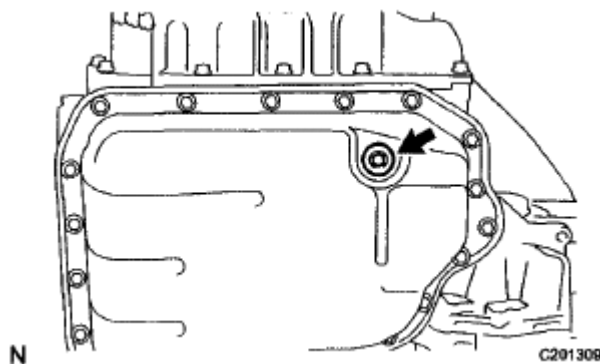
Locating Automatic Transaxle Oil Pan Sub-Assembly
